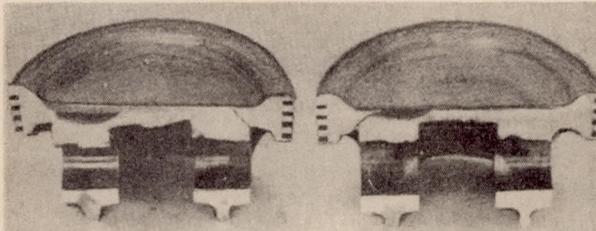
Slipper-type pistons fractured through piston-pin bosses and piston head.
